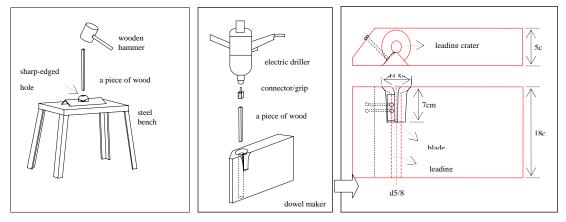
Sharp-hole dowel maker Fig. 7 and 8 Pencil-sharpener dowel maker and details
